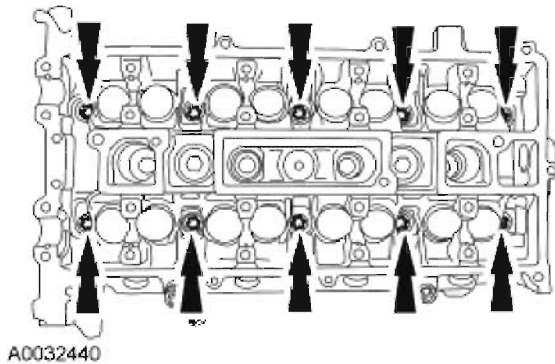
Identifying Loosening/Tightening Sequence Of Camshaft Bearing Bolts
